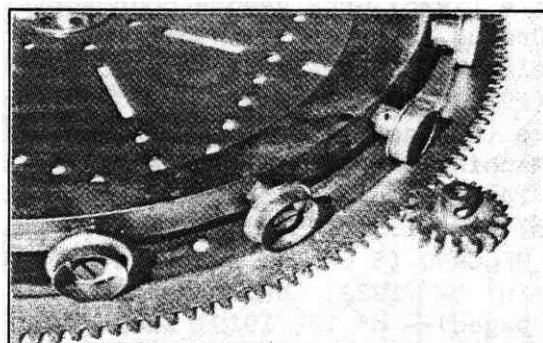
A close-up of the G.R.B. tooth form showing its "spiky" profile which contrasts with the normal involute curved teeth found in engineering practice.
